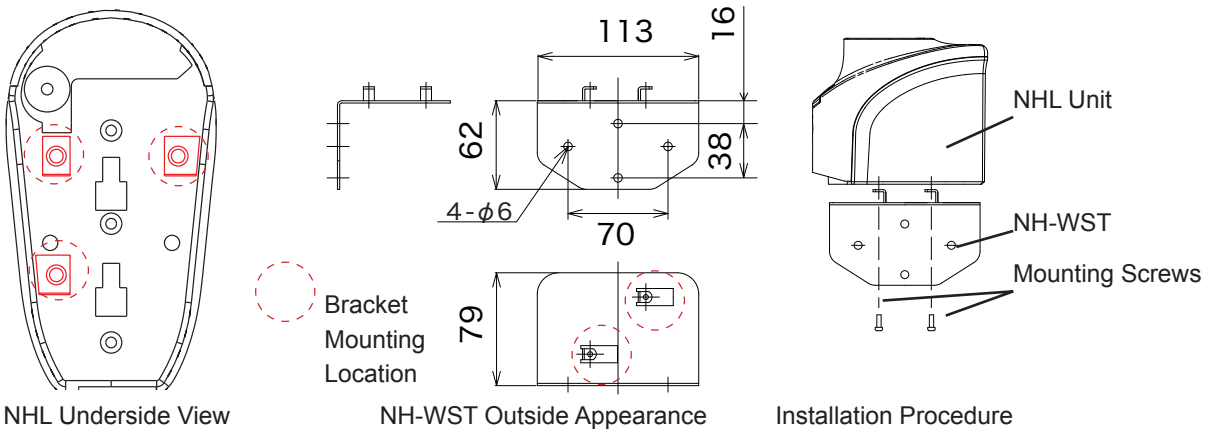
Wall Mount Bracket Installation Diagram
